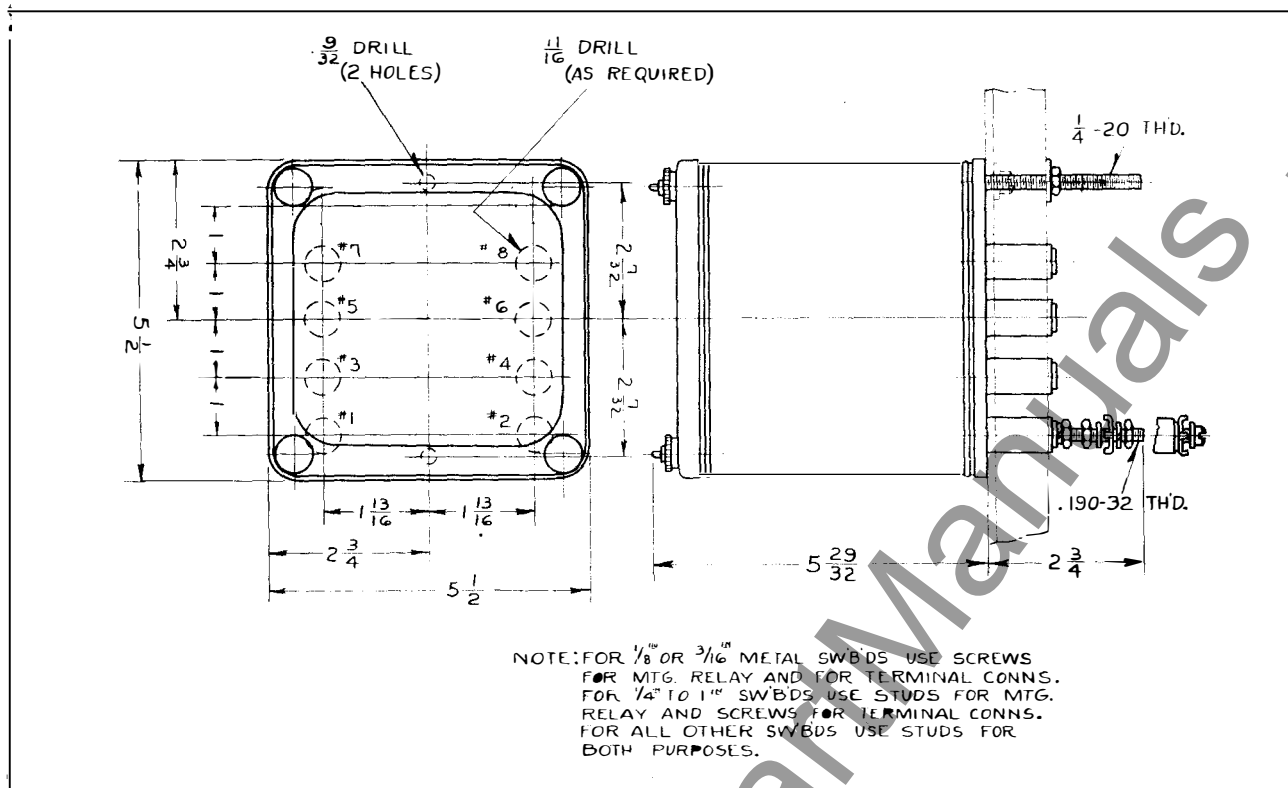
Outline and Drilling Plan for the Type TH Single-Element Relay.
